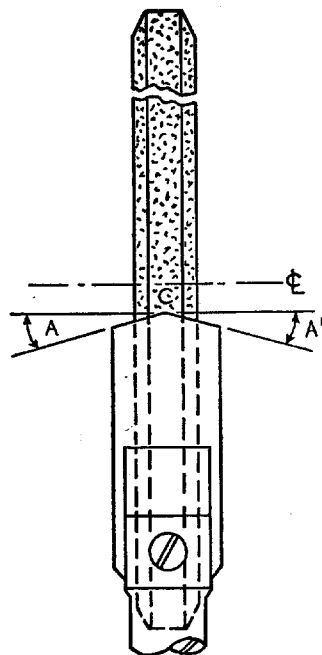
Shape of blade of tooth rest for sharpening staggered tooth milling cutters
